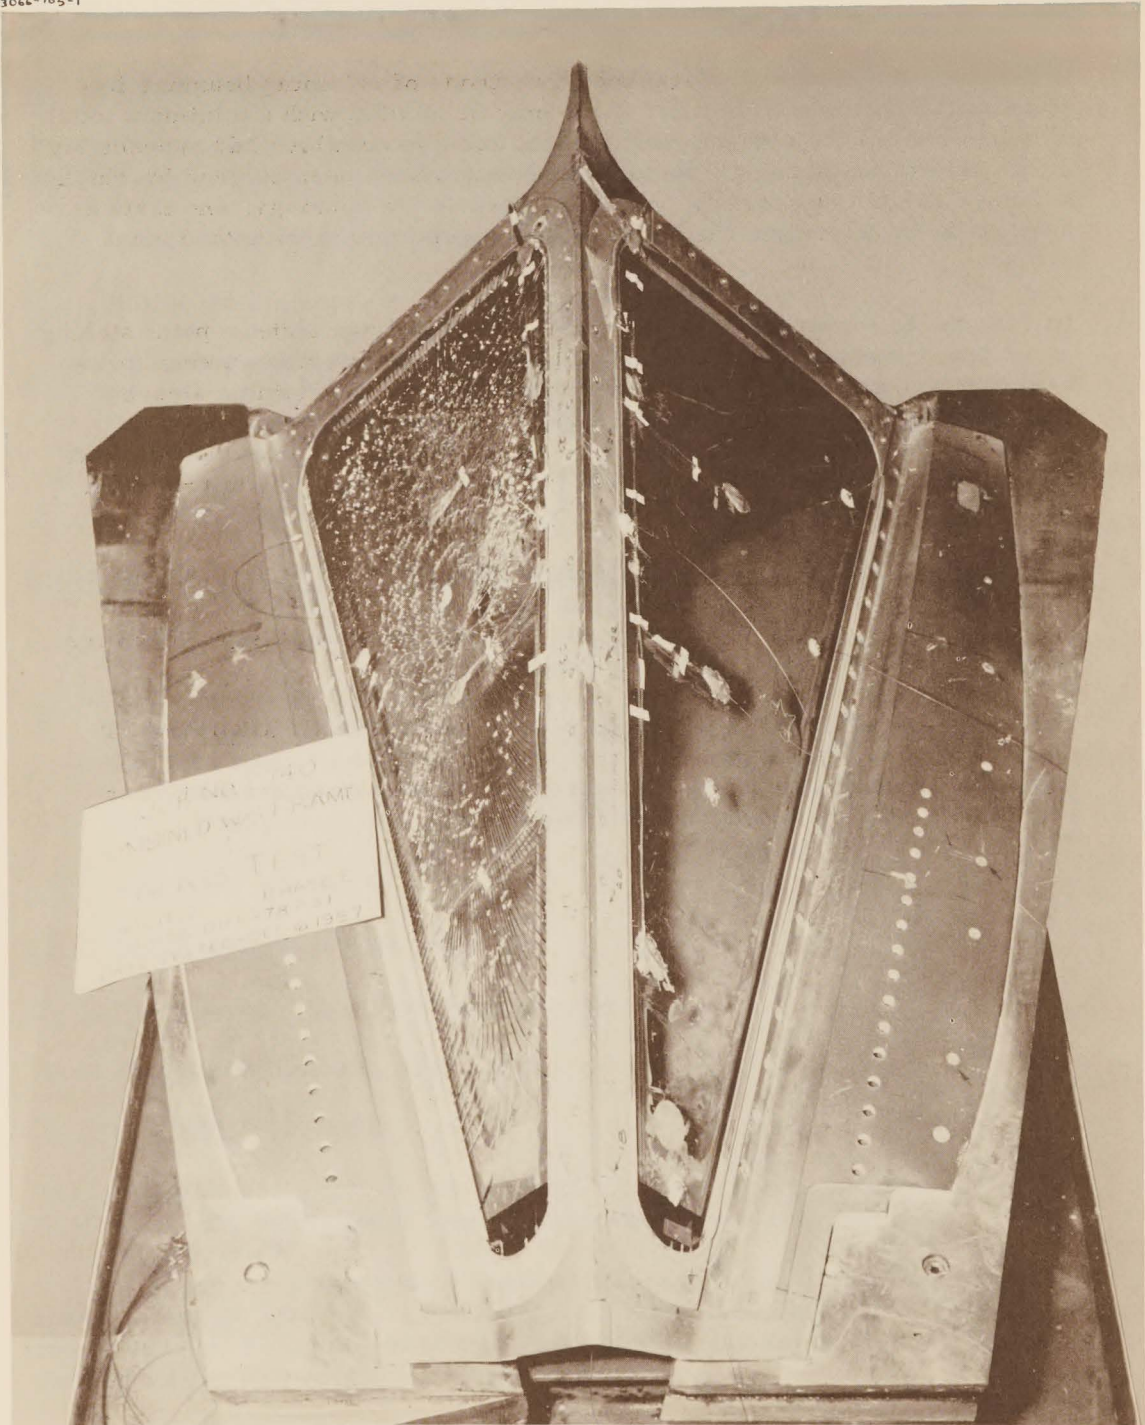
WINDSHIELD GLASS AND CASTING TEST
